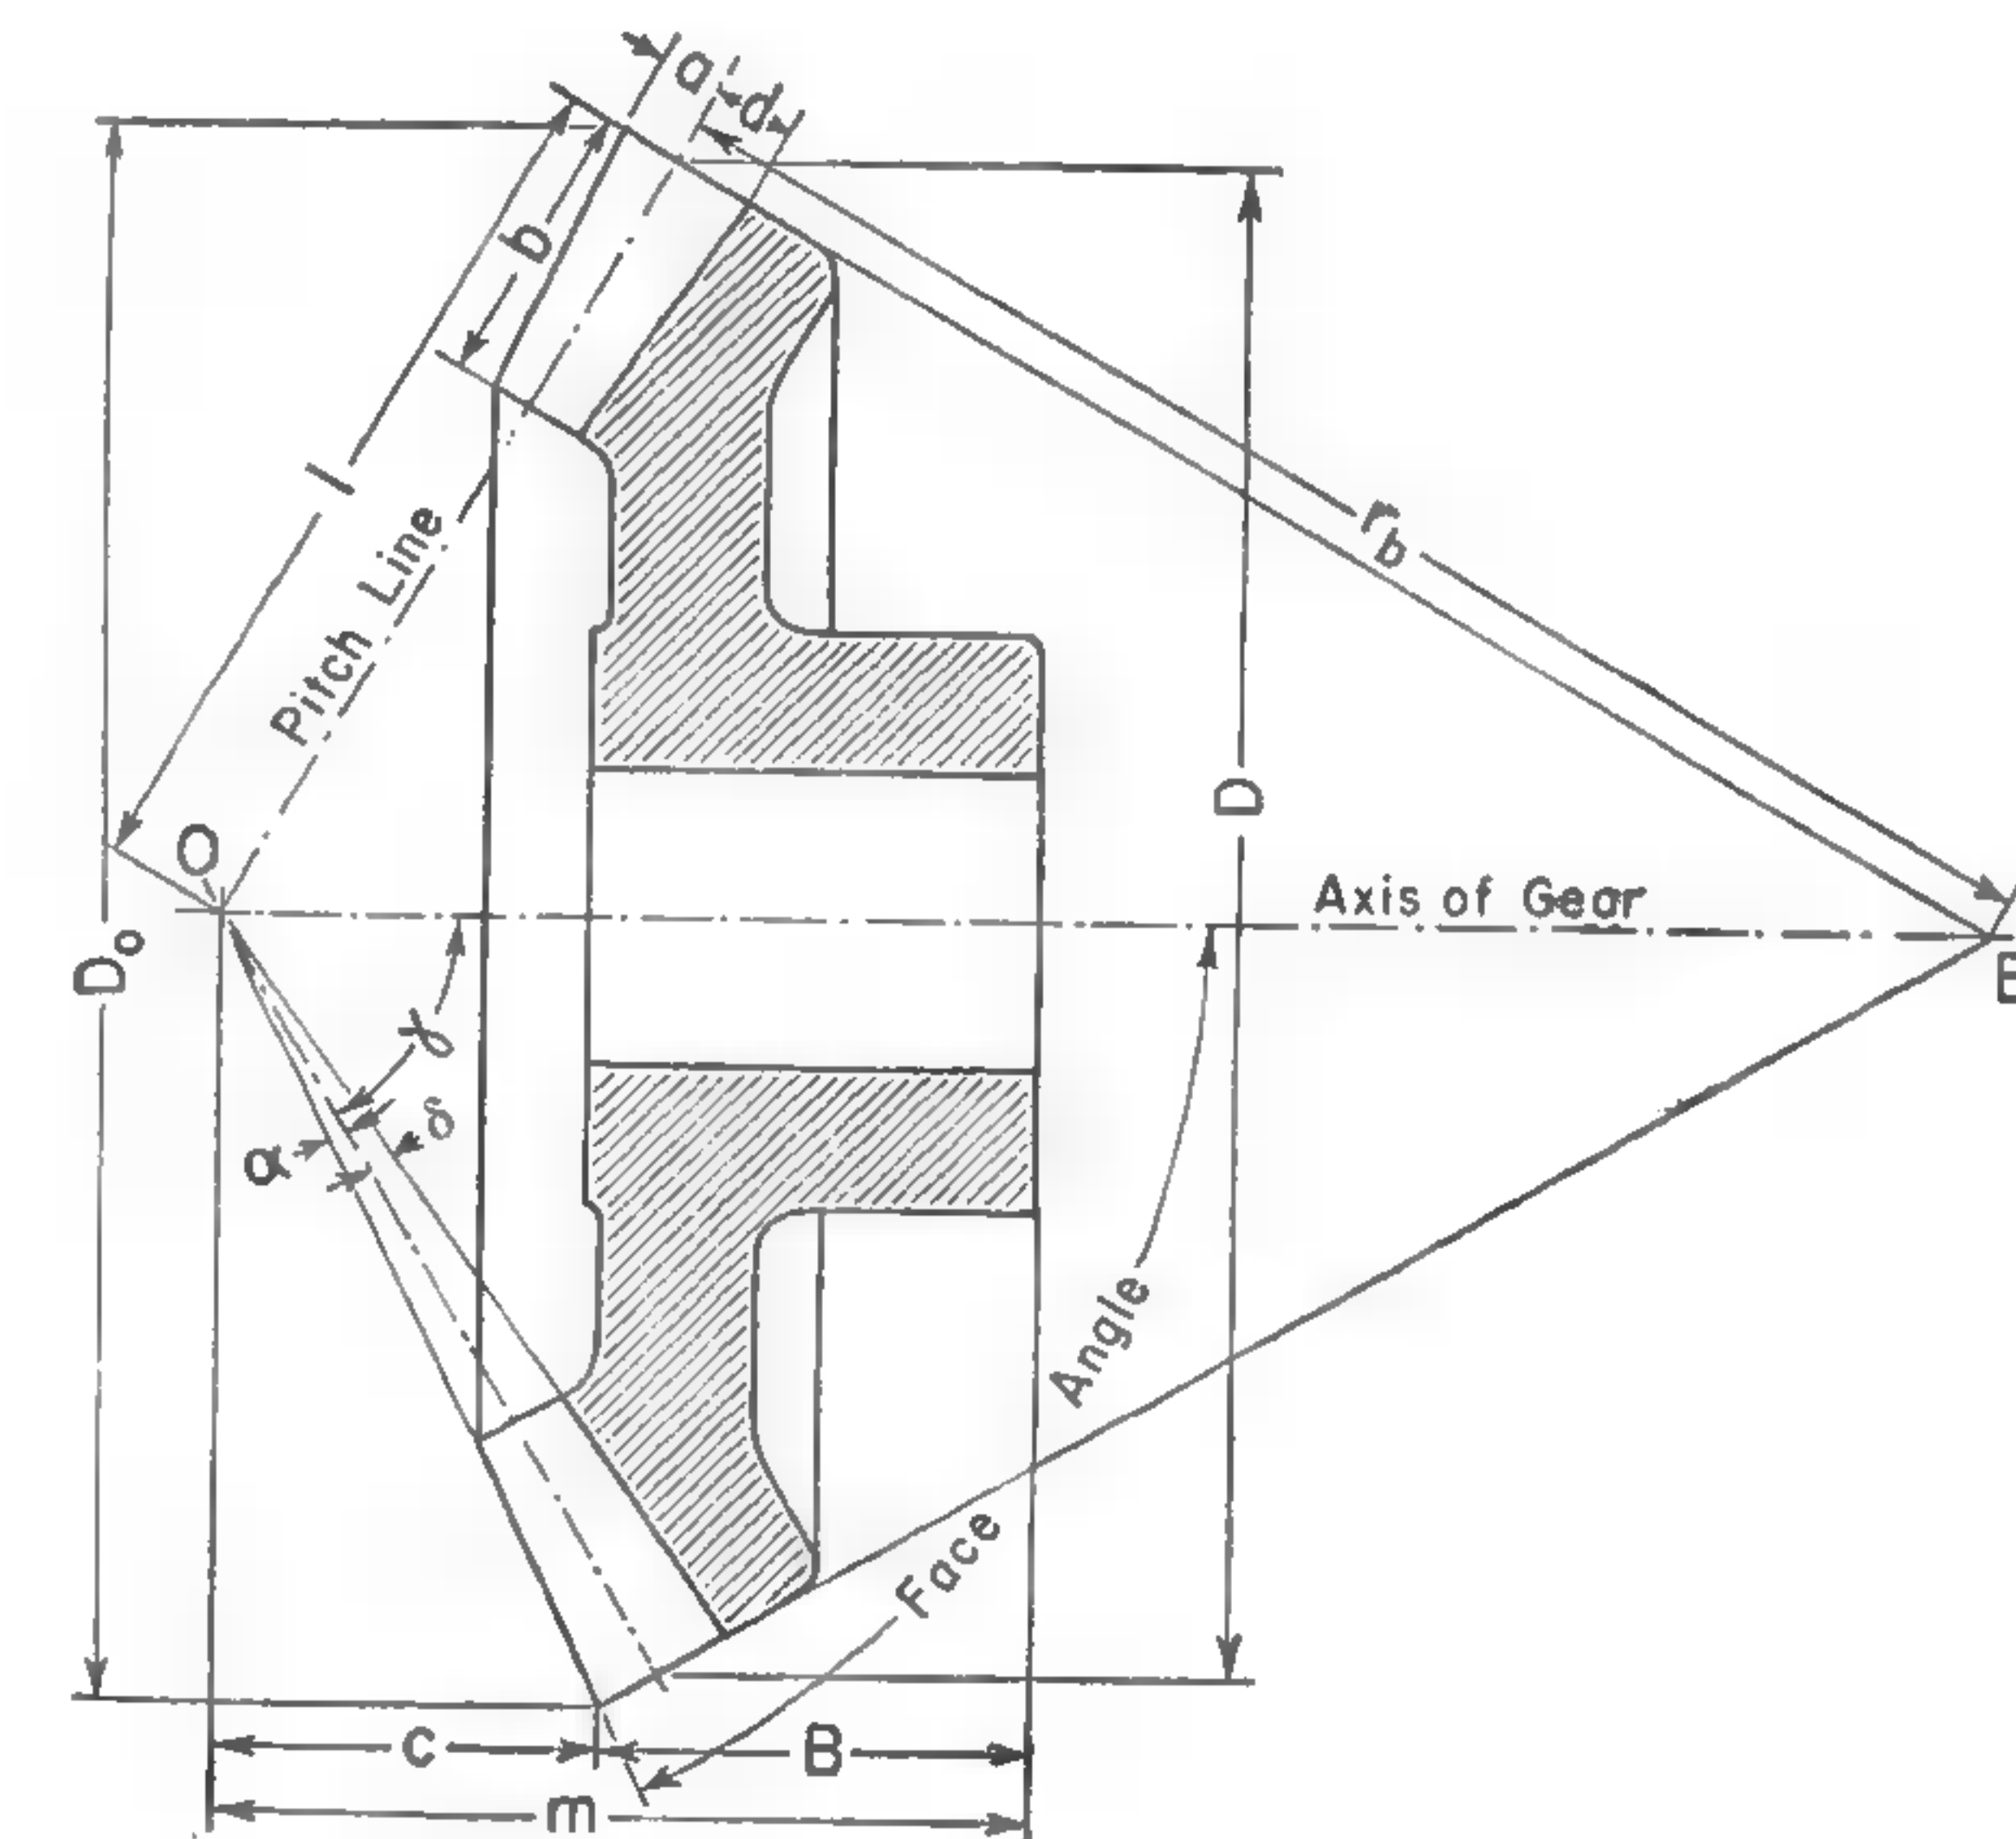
Definitions and dimensions relating to bevel gears.
